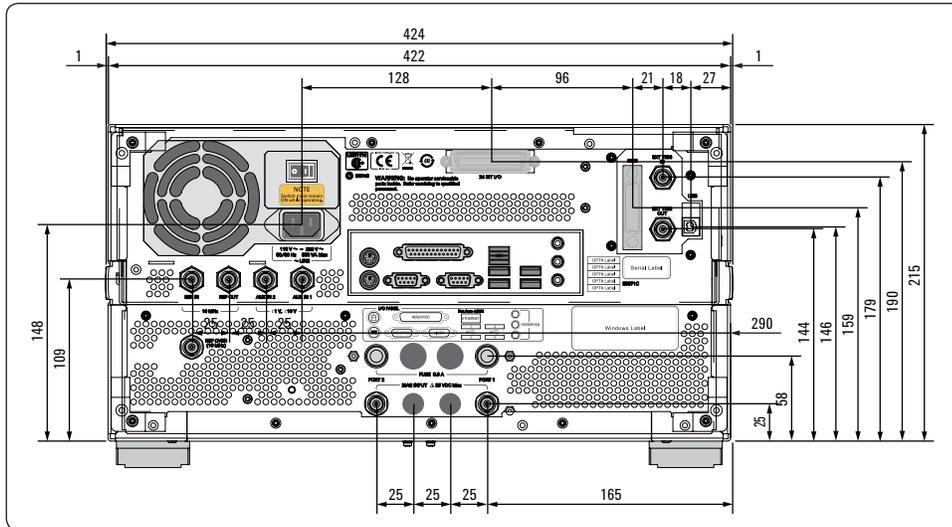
Dimensions (rear view with Option 1E5, in millimeters)
